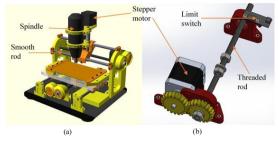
(a) Cyclone PCB Factory and (b) the Yaxis Motor Gear Assembly
